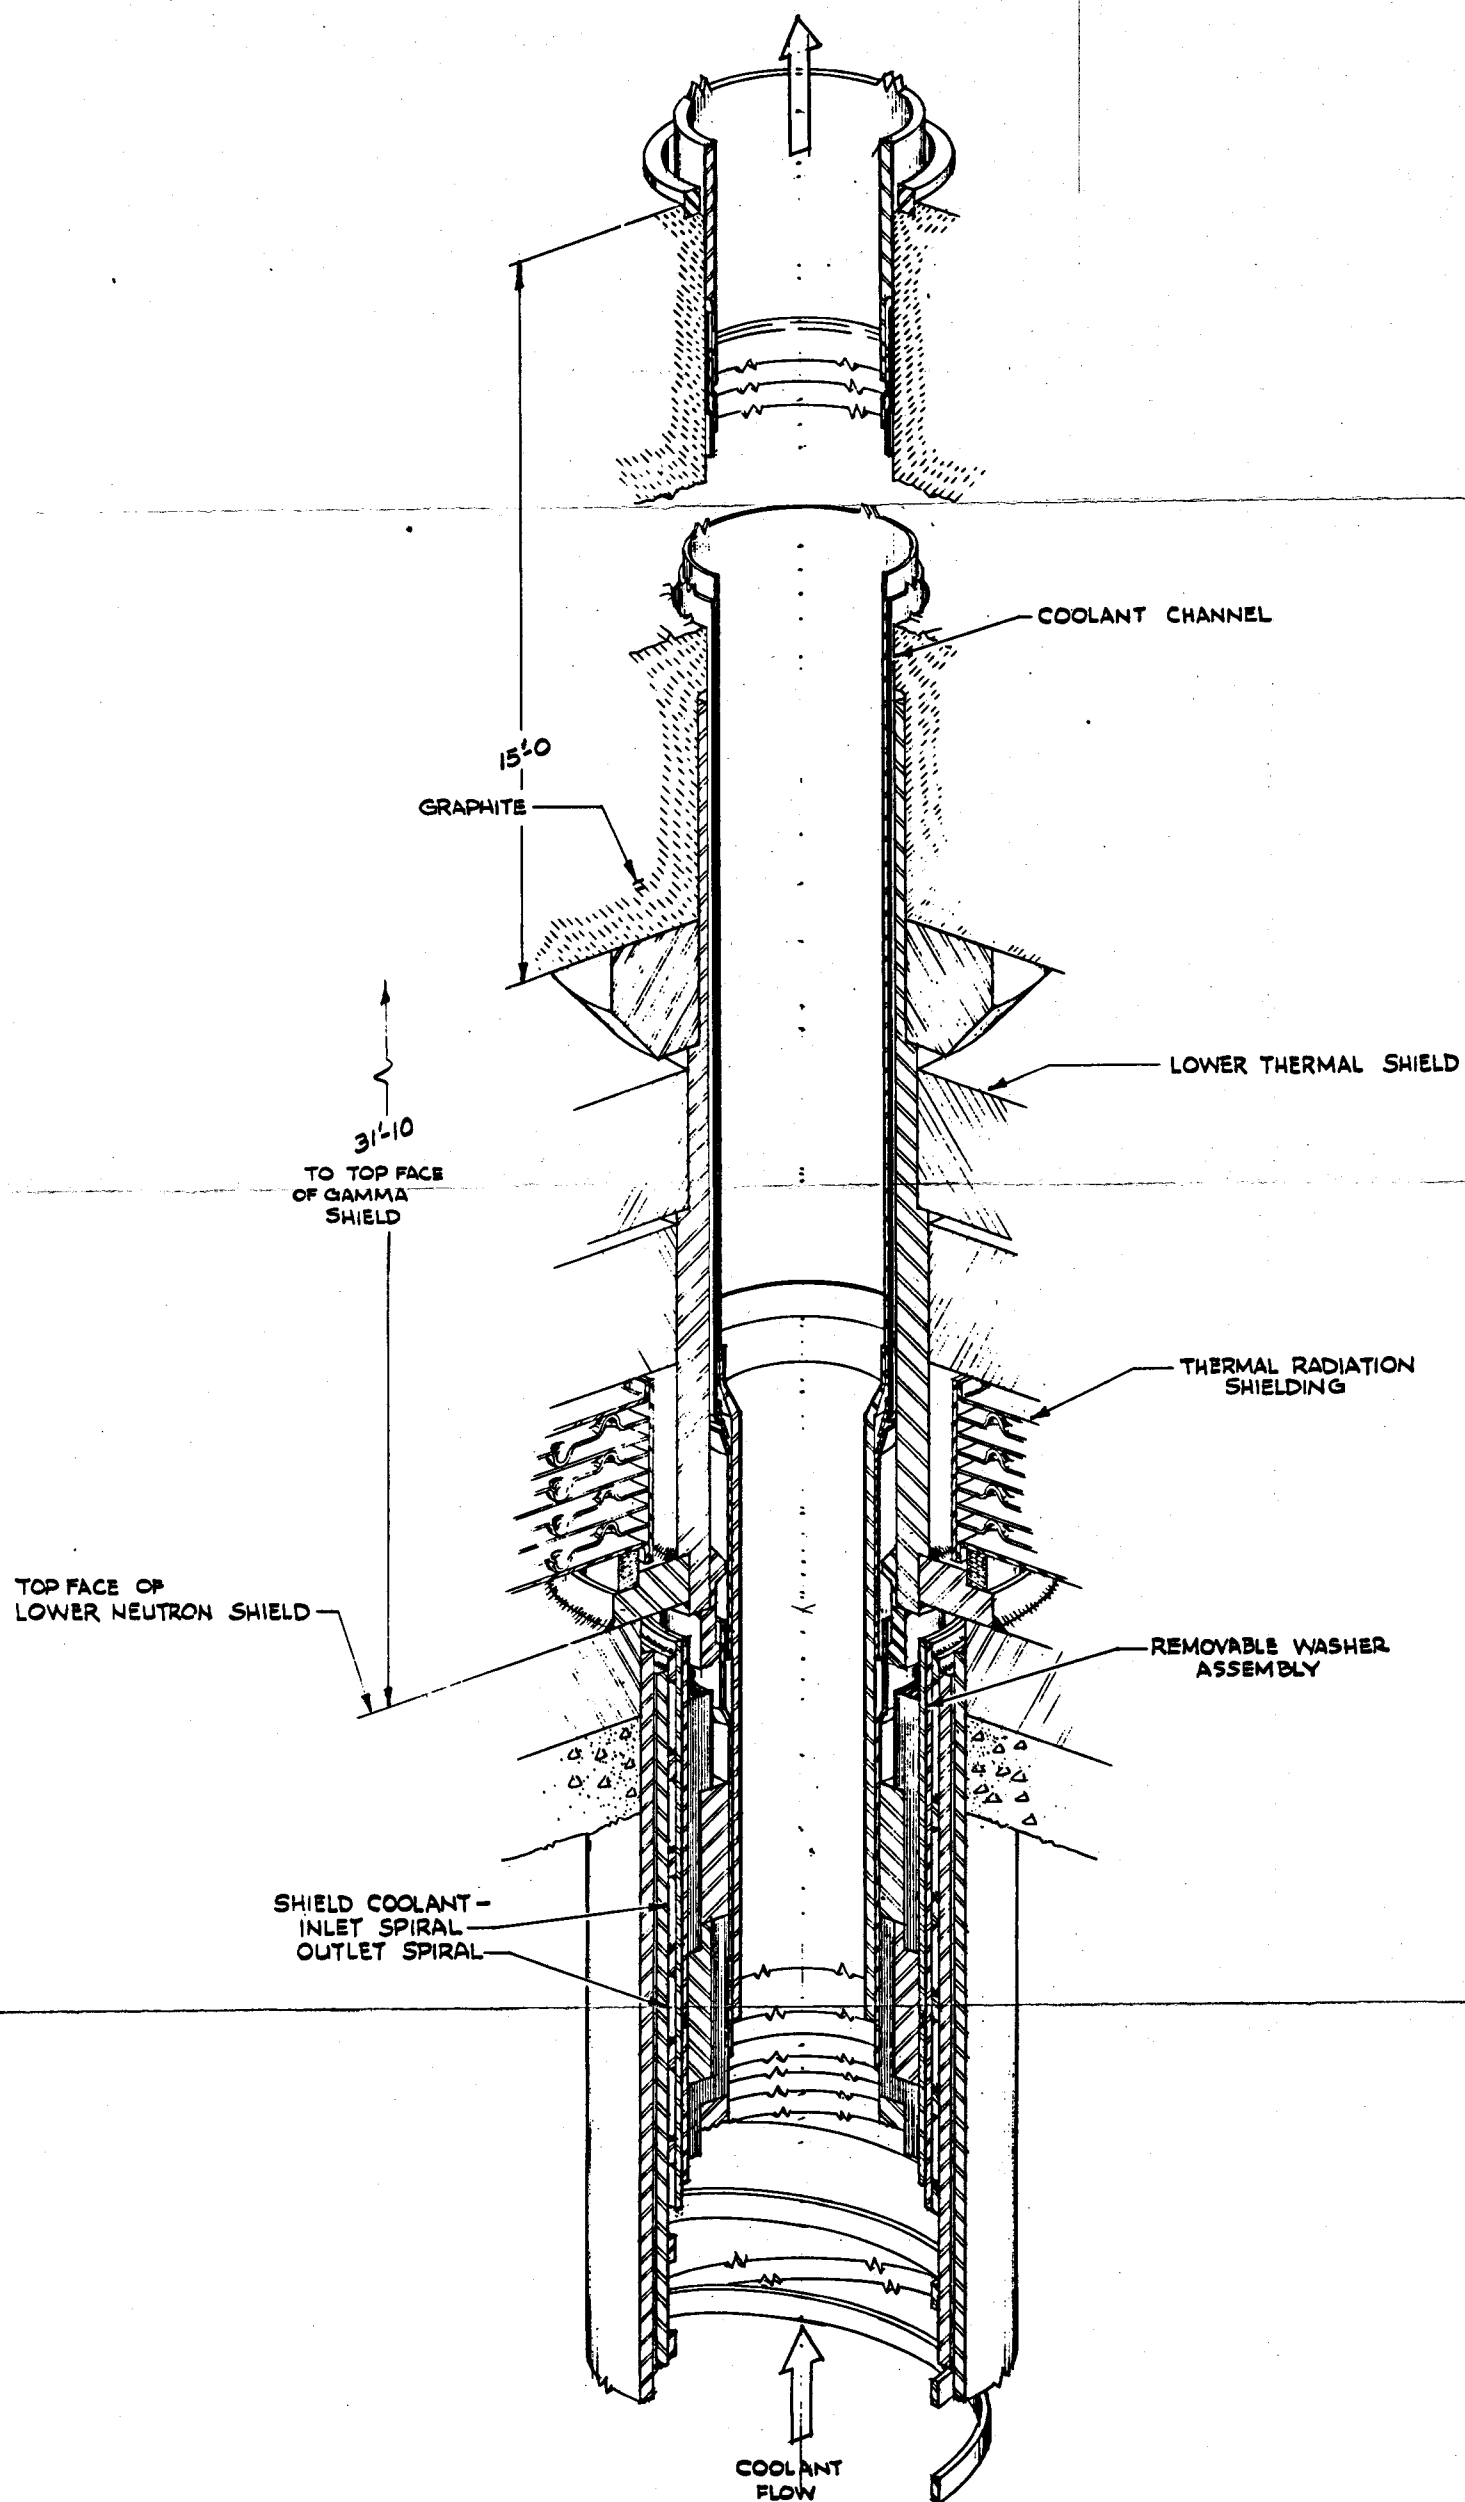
Coolant Channel Perspective Section thru Core and Lower Shield
